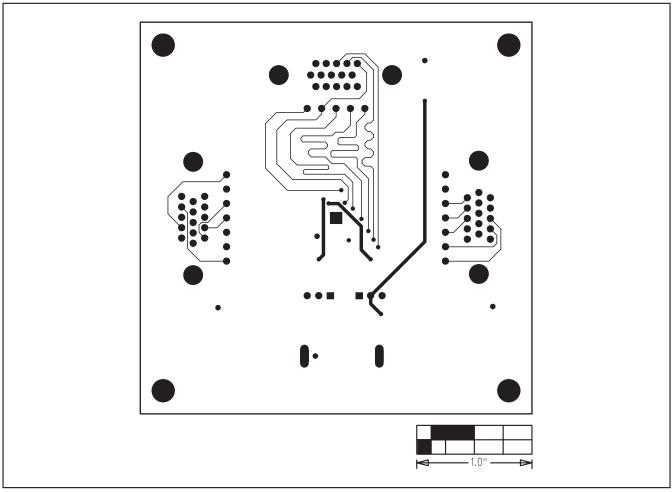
MAX4885E EV Kit PCB Layout—PWR Layer 3
